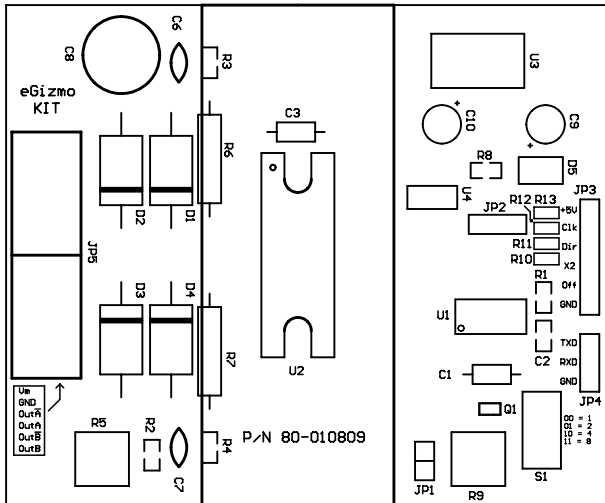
Micro-Step Stepper Motor Driver PCB (silkscreen layout)
